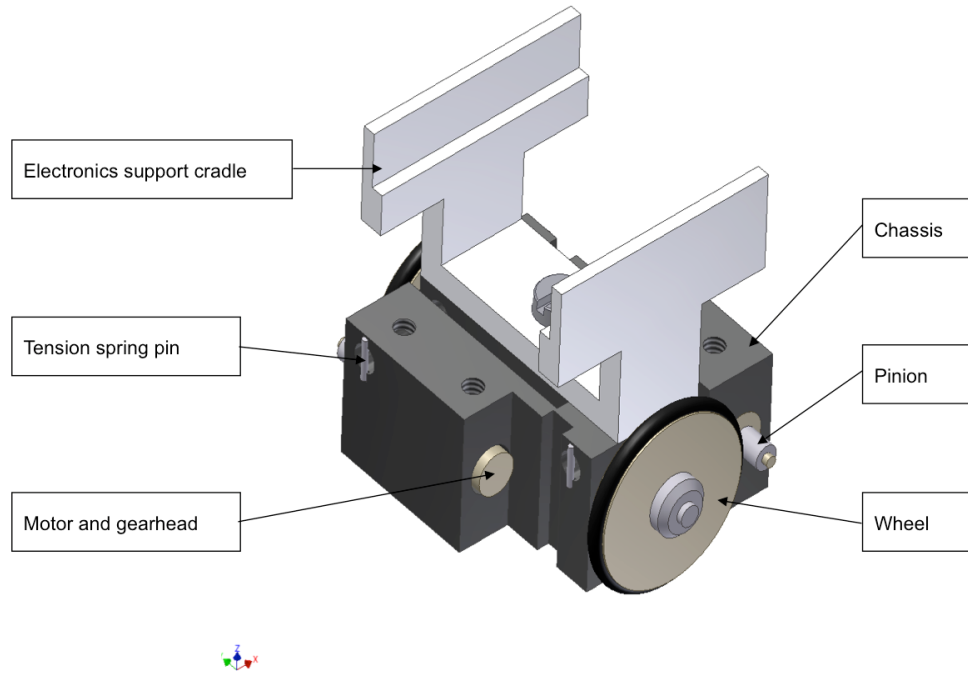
A CAD drawing of the MAPS chassis, this illustrates the spring-loaded flexures in which the motors are housed and also the friction drive system.
